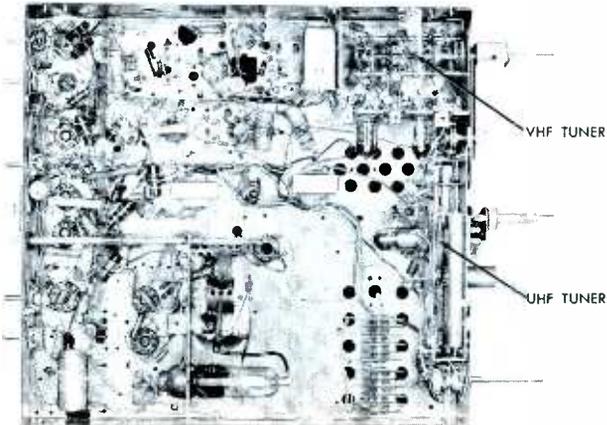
Bottom View of the Motorola Chassis WTS-518Y.
